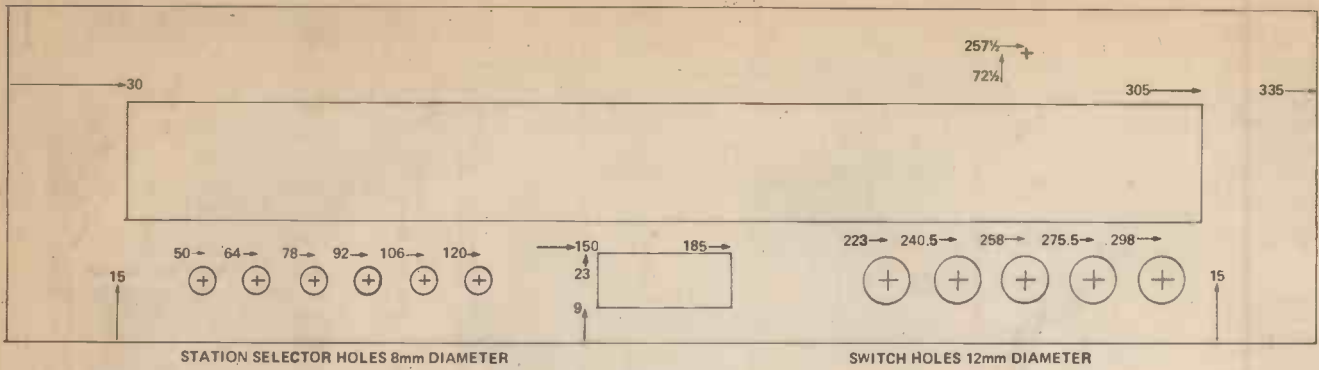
The metalwork required on the front panel. Dimensions in millimeters.
